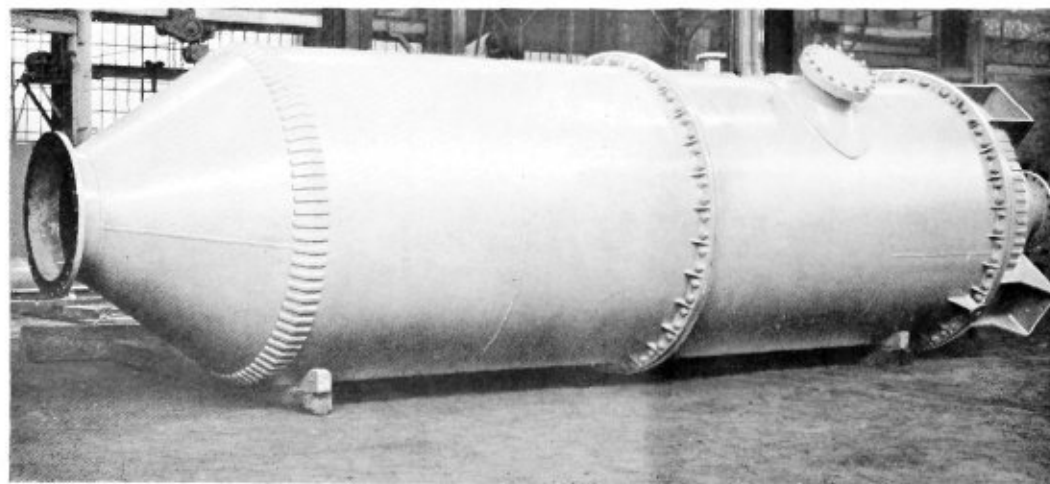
Nickel-clad steel high concentration evaporator, 84 inches diameter by 30 feet high. Arc welded construction
